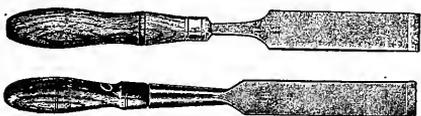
CHISEL TYPES. UPPER, TANG; LOWER, SOCKET FIRMER.
